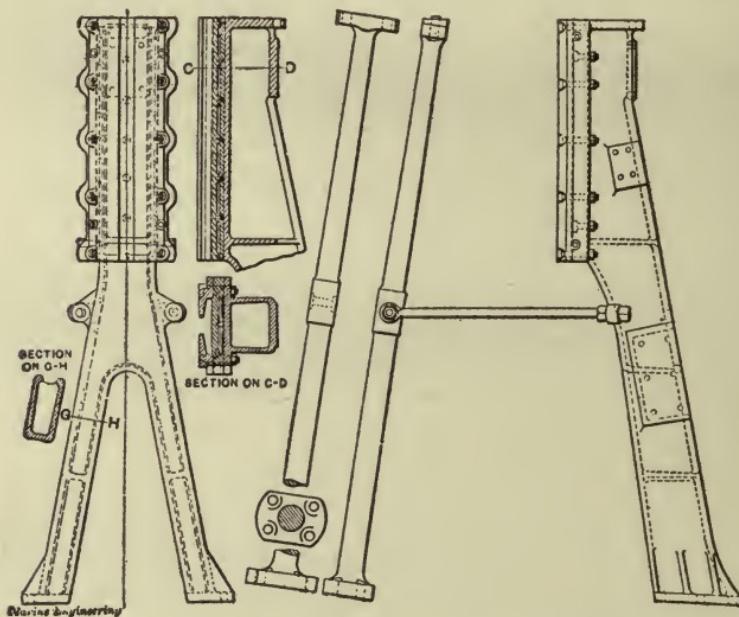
INVERTED Y AND CYLINDRICAL COLUMN
